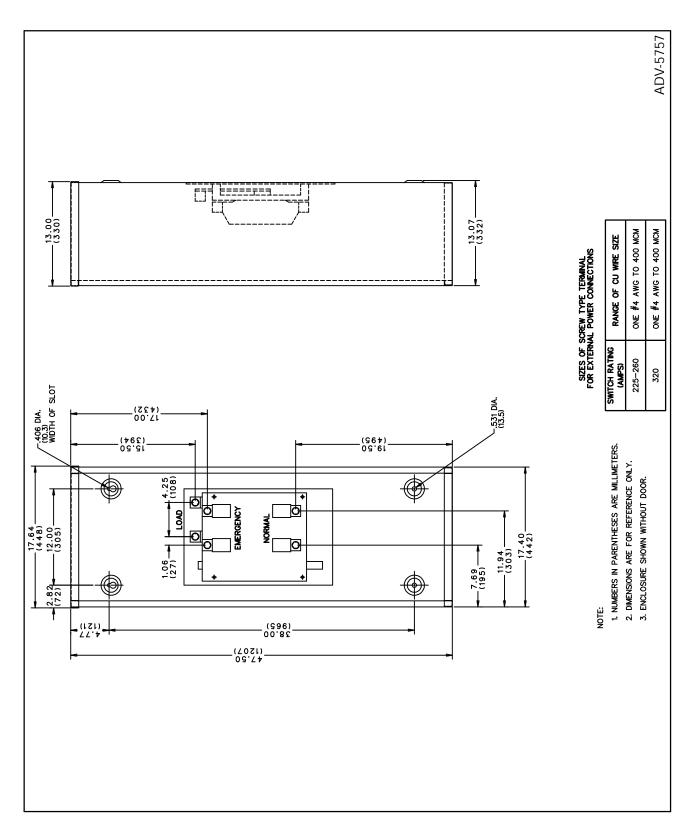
Installation Drawing– 225-320 Amperes, Enclosure Mounting
